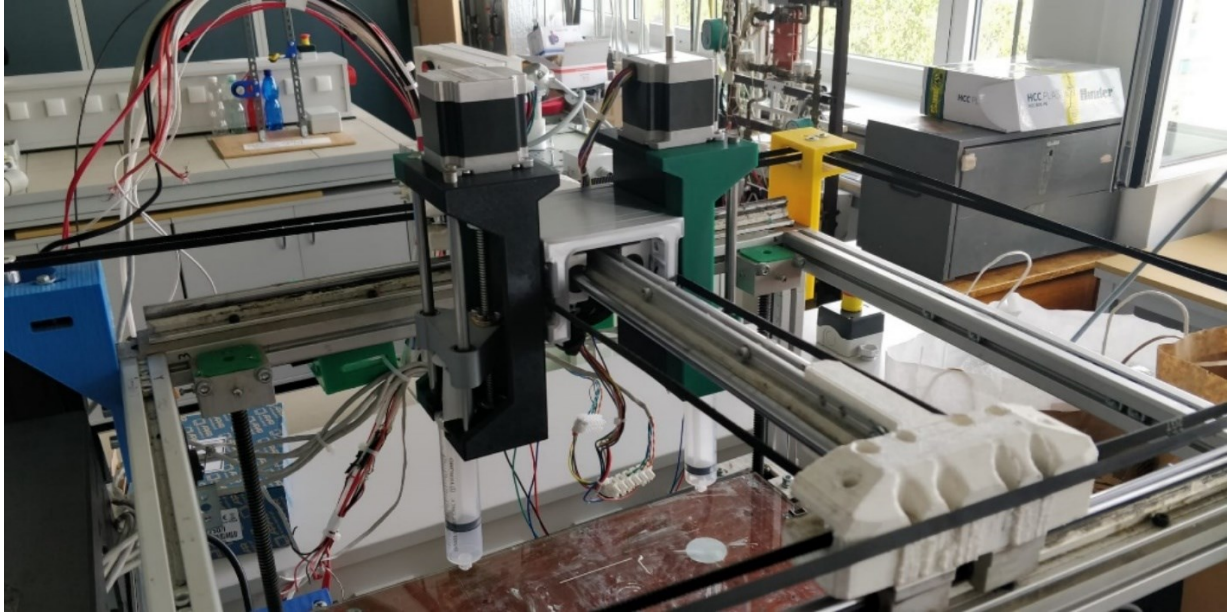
3rd Design Iteration: Testing on CTU FME Lab 3D Printer
